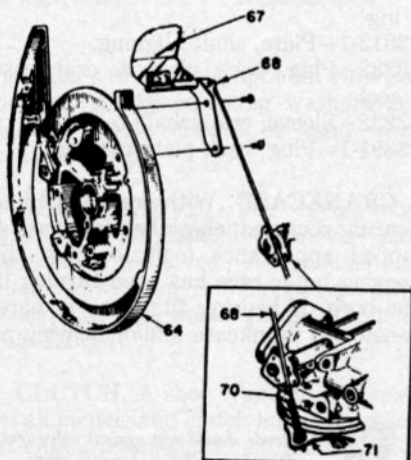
View showing governor hookup used on Super WIZ 66 and Super WIZ 80. Refer to Fig. HL215; throttle rod is connected at hole numbered (3). Governor spring (70) is compressed between bracket (71) and shoulder on governor rod.
